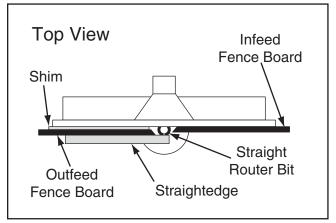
Fence setup for edge jointing (guard removed for clarity).
